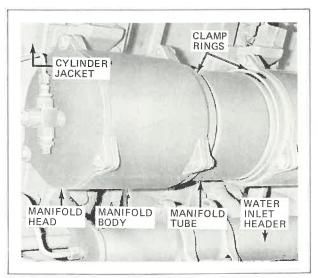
ENGINE AIR INTAKE MANIFOLD.
